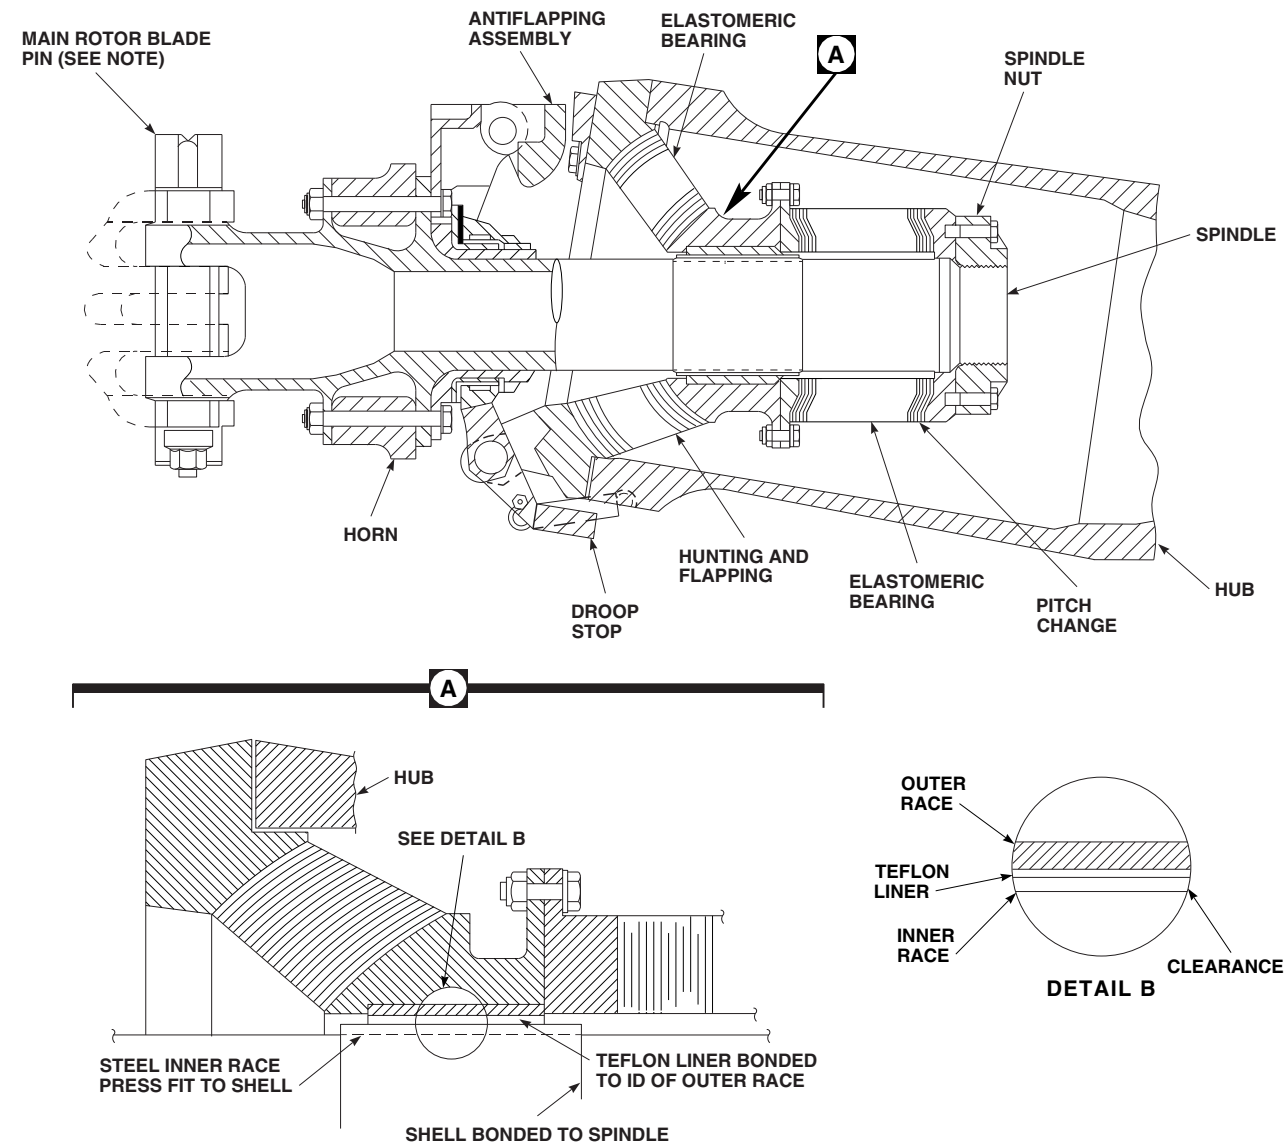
MAIN ROTOR HEAD
